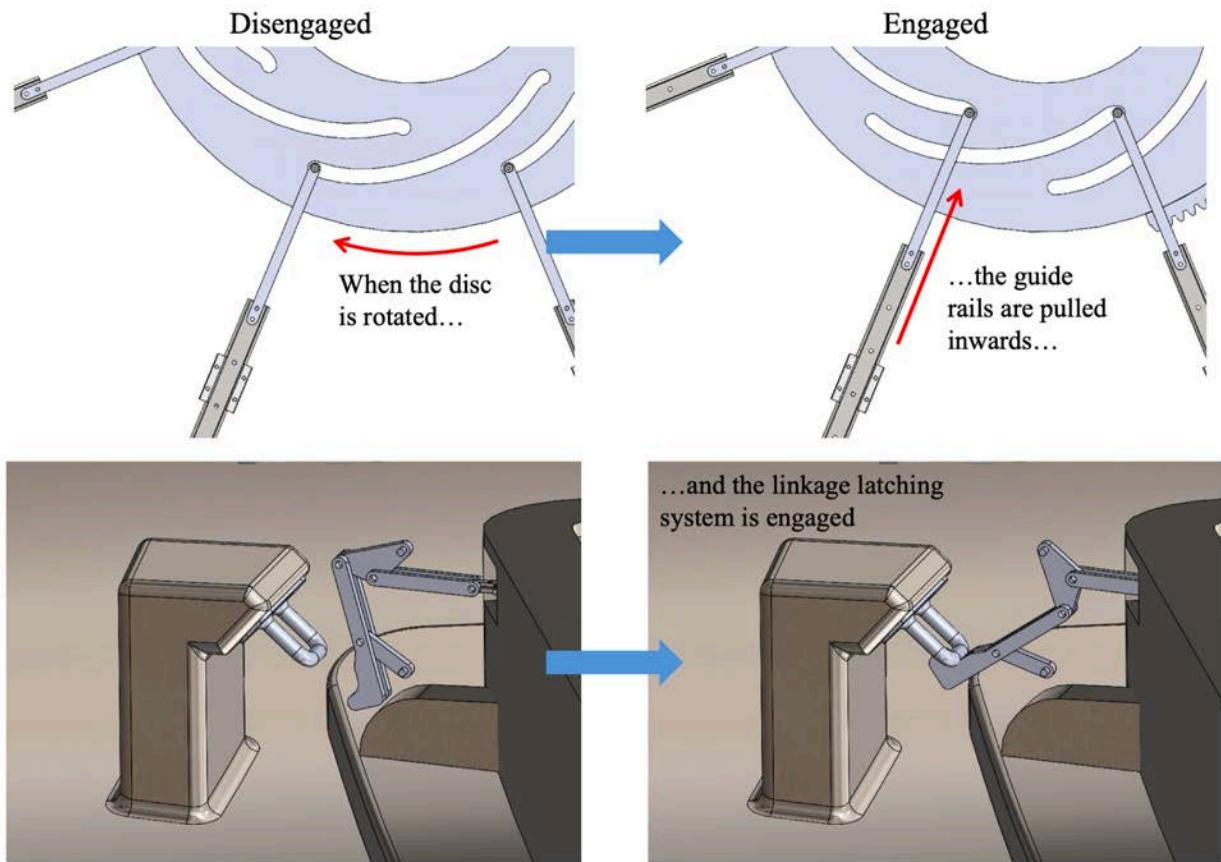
Rotational mechanism subassembly in disengaged and engaged states
